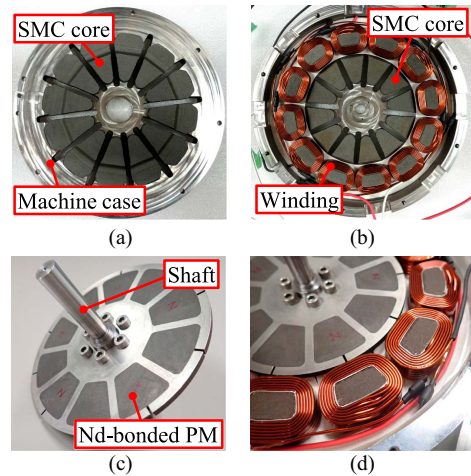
Prototype of proposed T-AFPM. (a) Stator 1. (b) Stator 2. (c) Coreless rotor. (d) Assembled rotor and stator 2.
